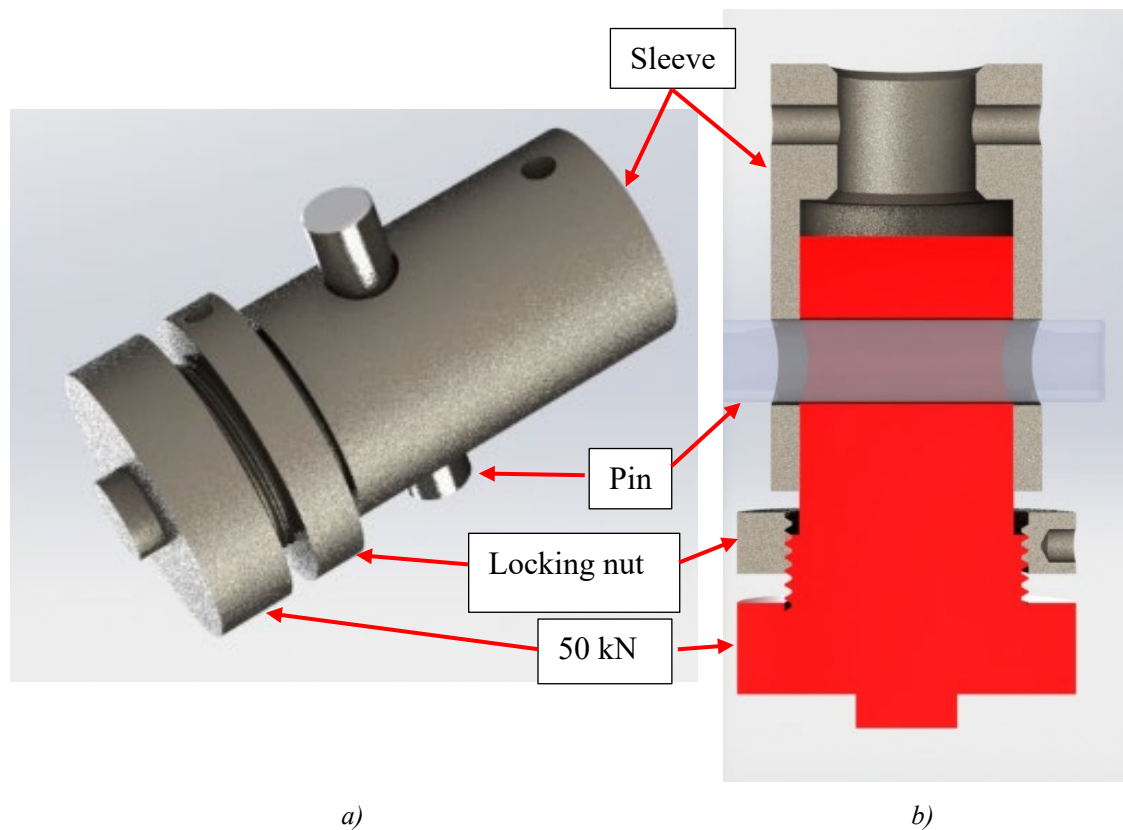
a) Rendered image of the final assembly of the platens with the sleeve connector; b) Section view of the platen.
